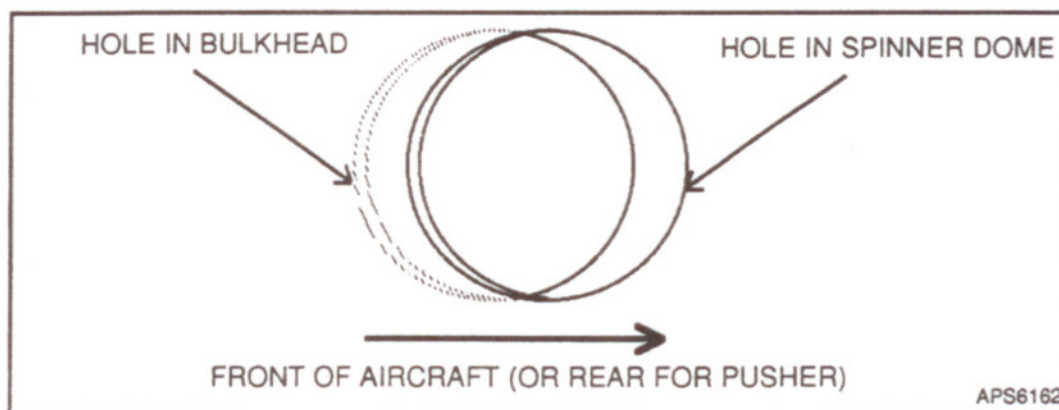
Spinner Dome to Bulkhead Mounting Hole Alignment
